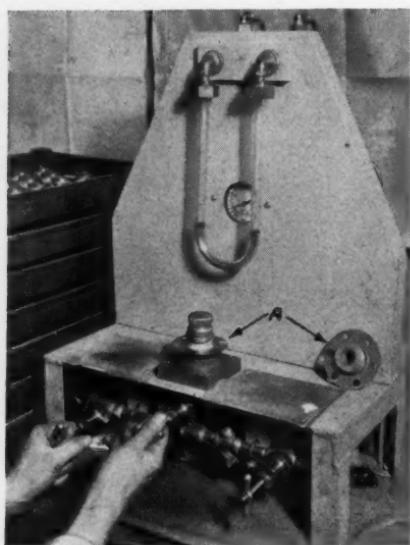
Testing the seal bellows assembly, using a vacuum tester.
